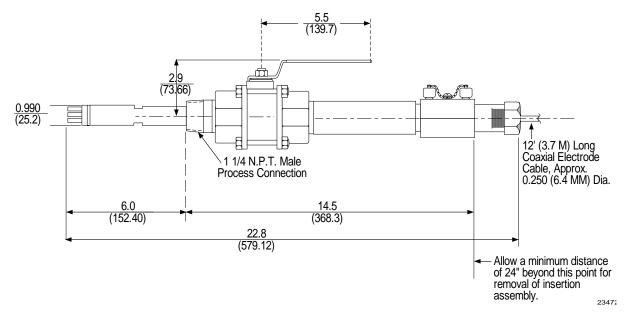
Outline & Dimensions Drawing—Catalog 7774 Stainless Steel Insertion/Removal Assembly
